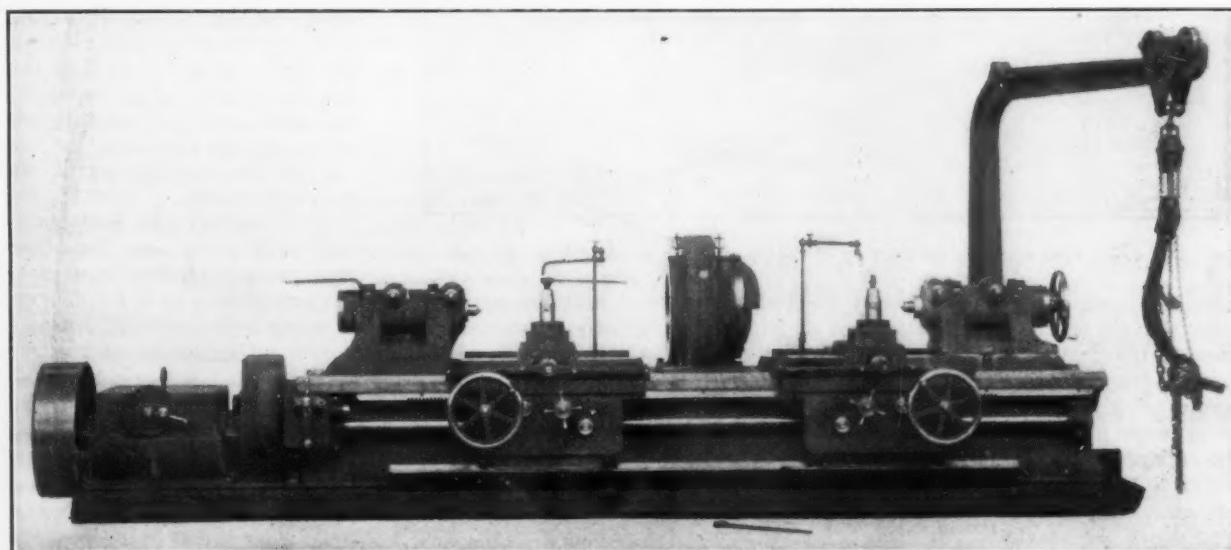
The New Axle Lathe with Crane, Built by the Lodge & Shipley Machine Tool Company, Cincinnati, Ohio.
